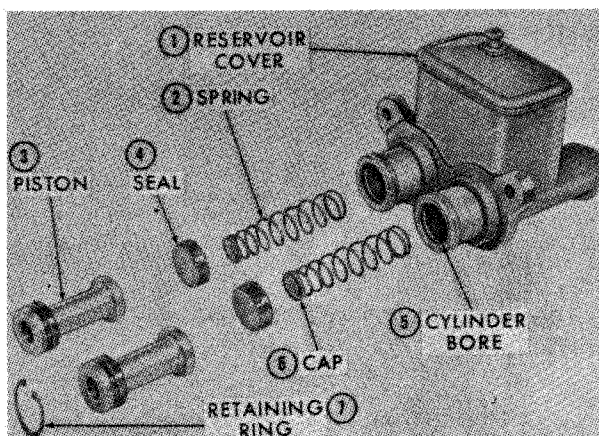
Exploded view of brake master cylinder assembly. Piston and secondary seal are available as an assembly only. Master cylinder reservoir is kept filled by supply line from hydraulic system and excess oil is returned to rear axle center housing on early 8000—9000 models only.
